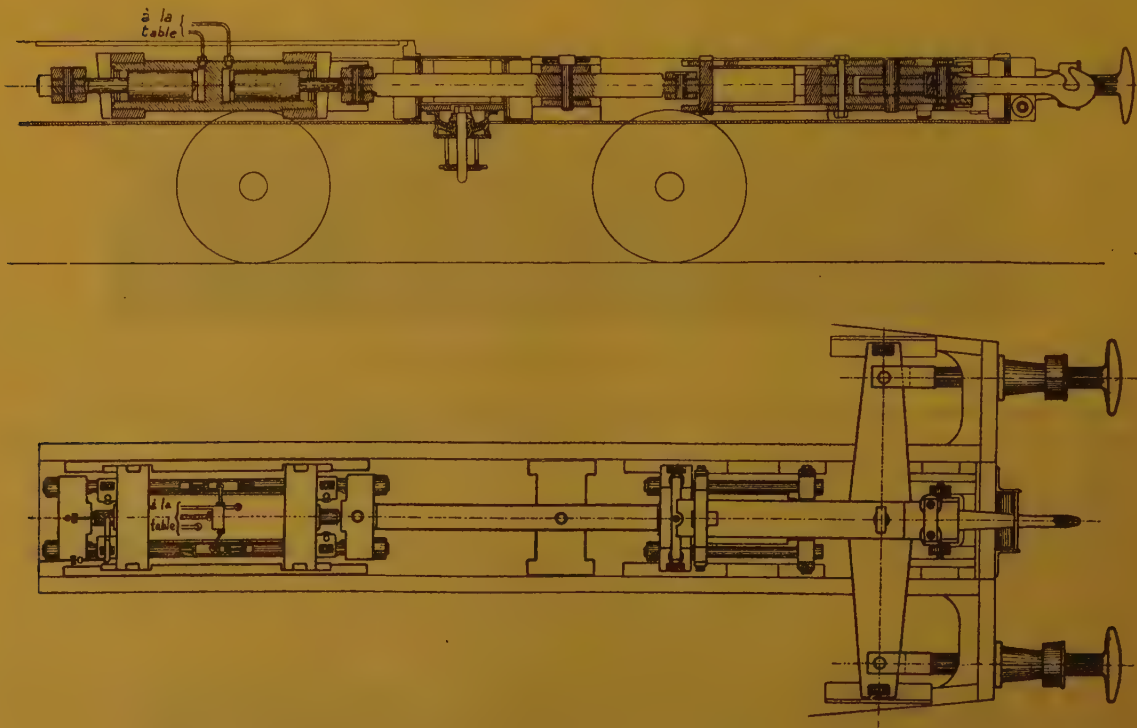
Drawing and buffing gear and press pot of hydraulic dynamometer.
